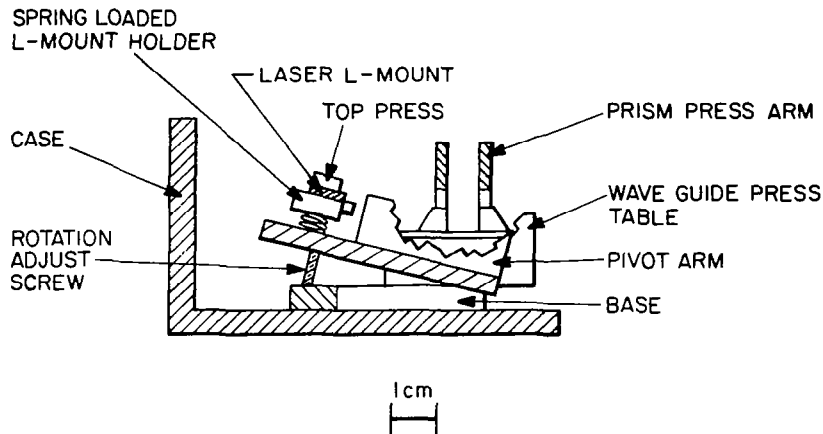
Cross-section of mechanical module showing details of laser-lens-LNT waveguide mount.
